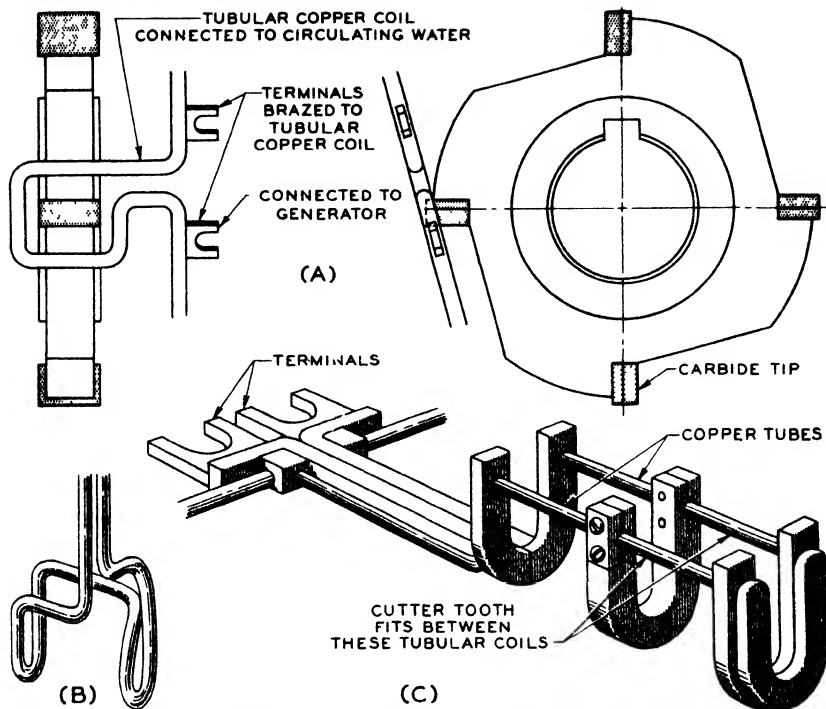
Specialized Induction Brazing Coils for Milling Cutters
